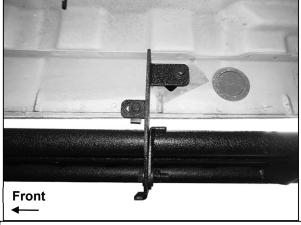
Attach passenger/right Running Board to #3, #4 and rear Brackets
